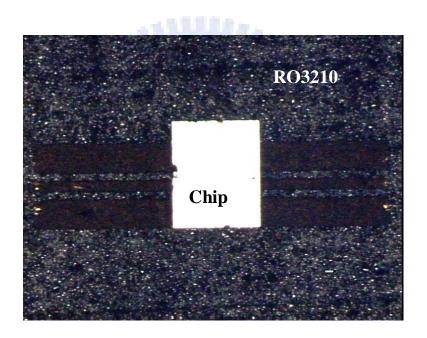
The final photograph of the flip chip packaged m-HEMT device
